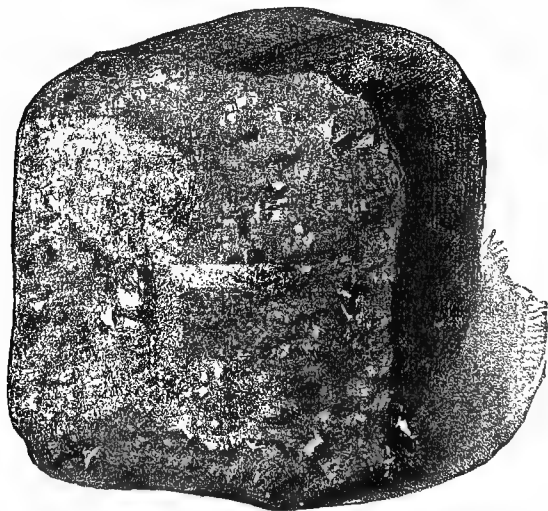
FRACTURED SURFACE OF LINK OF TESTING MACHINE.
